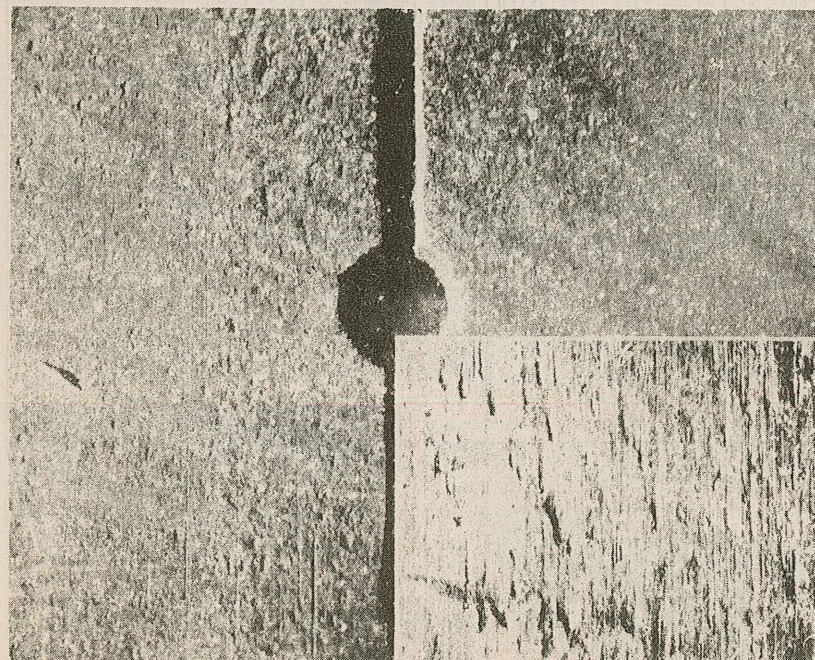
Grit, buddy, grit. Sand put in with the oil started the dirty work. Pieces of metal helped too. Result, cut shaft and ruined bearings. Look for imbedded pieces at left. See what they did enlarged at right.
